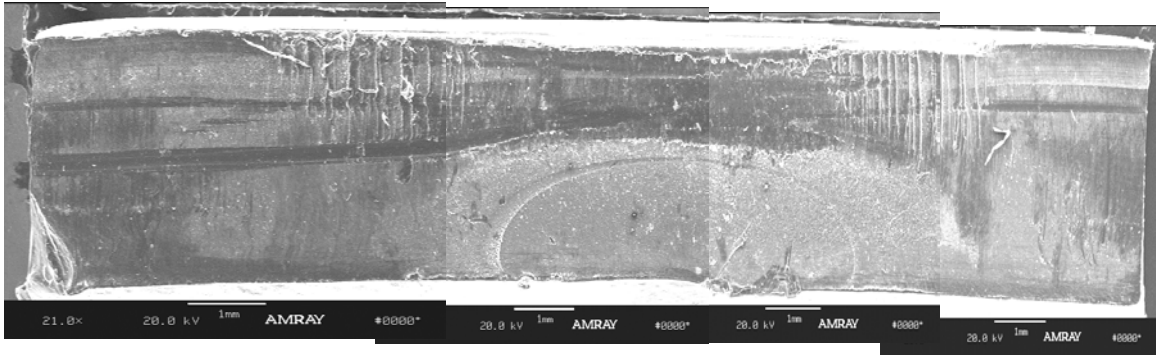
Fracture surface of Specimen 1 from Sample 131-SB-SE-6
